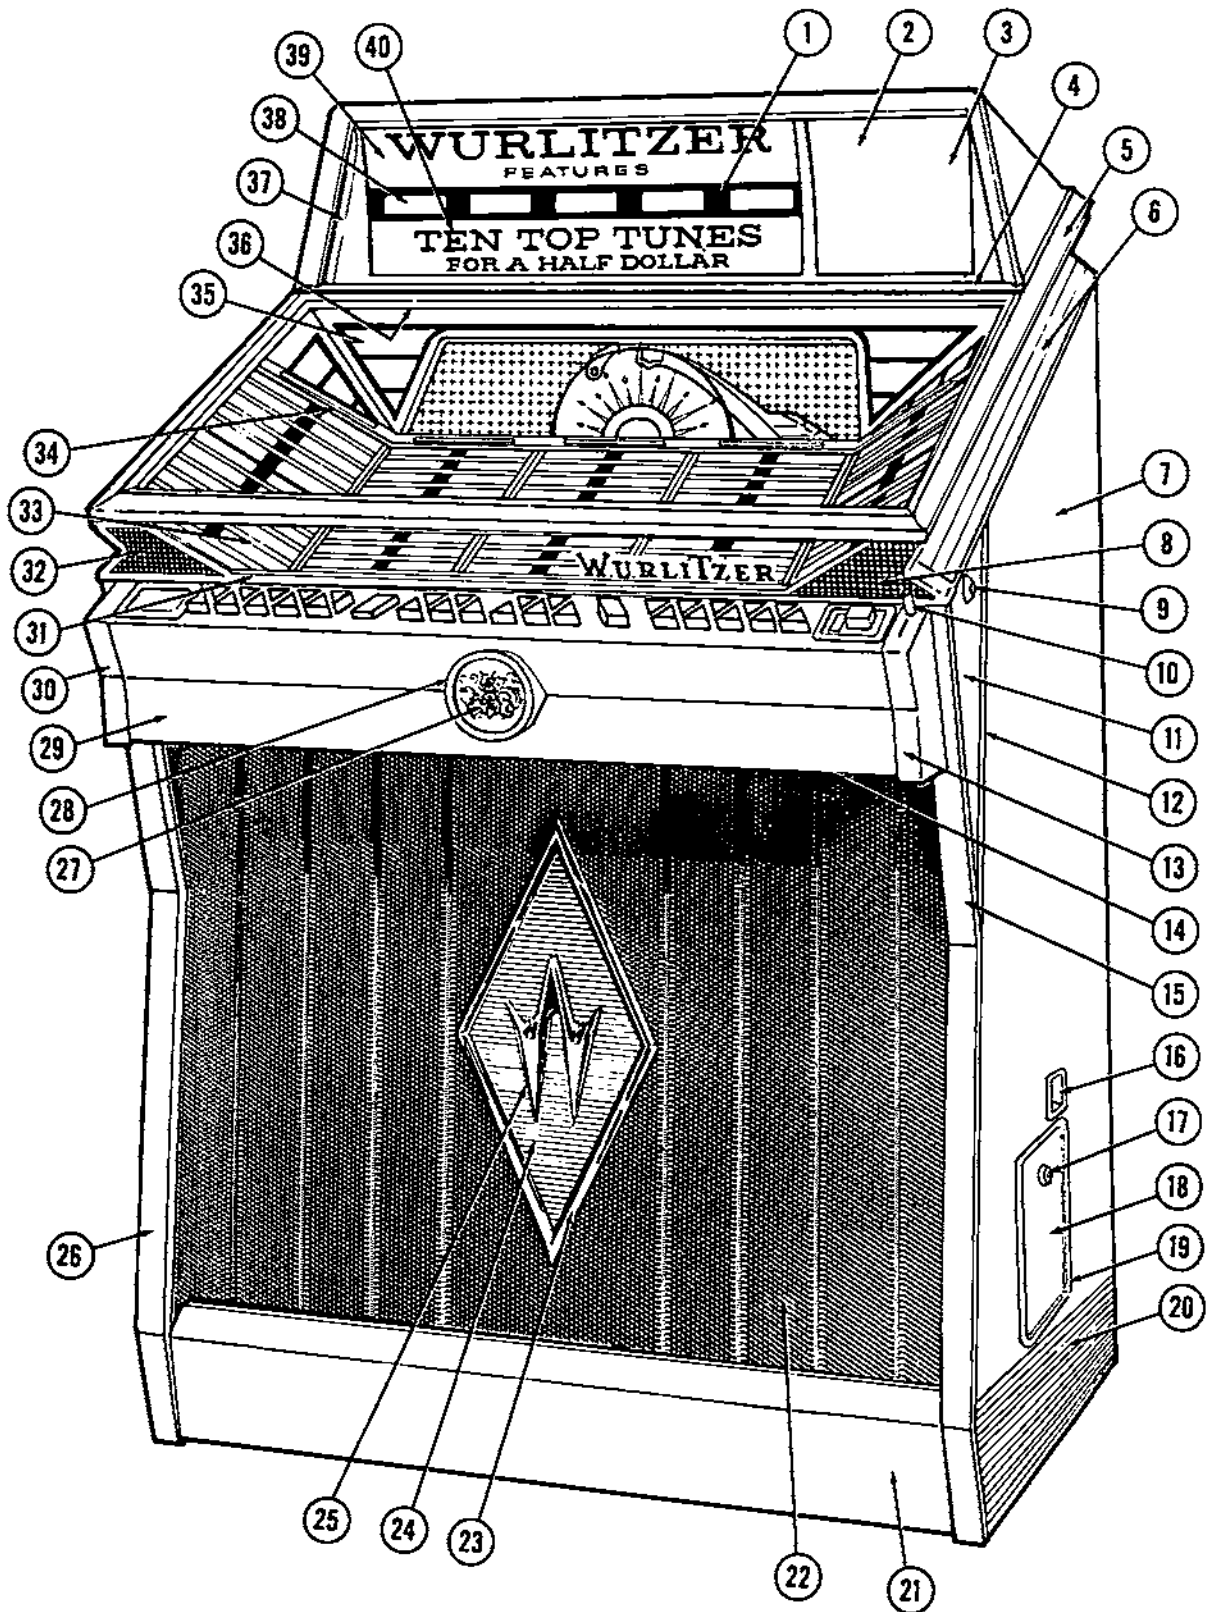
TRIM AND MOUNTING - FRONT VIEW - 2600
